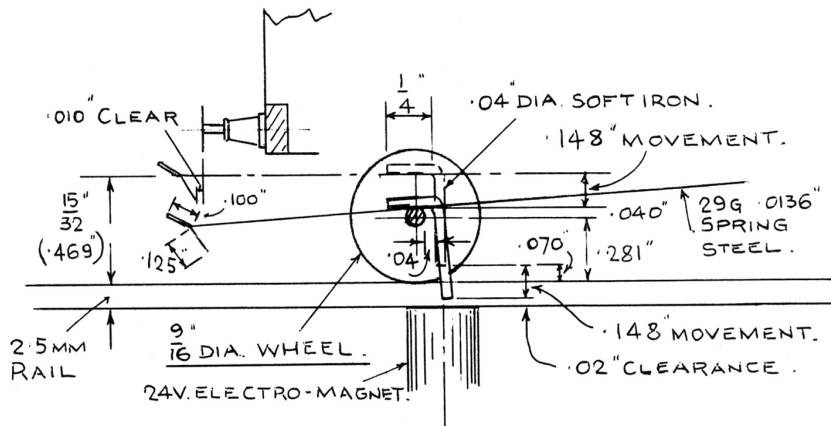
PROPOSED DIMENSIONS. 'S' GAUGE.
